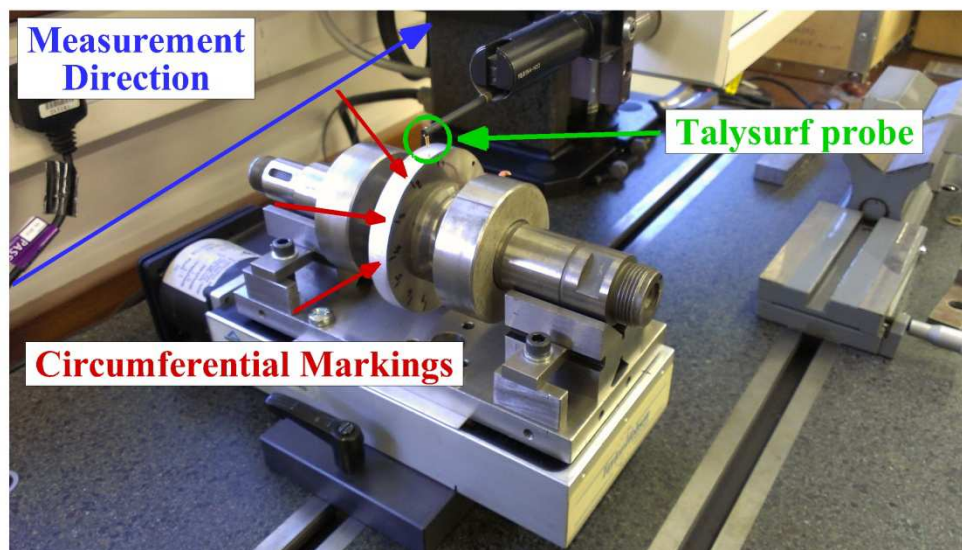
Talysurf and moveable stage with ground disk mounted on test shaft with solid bearing replacements. Circumferential location markings are indicated by red arrows.
